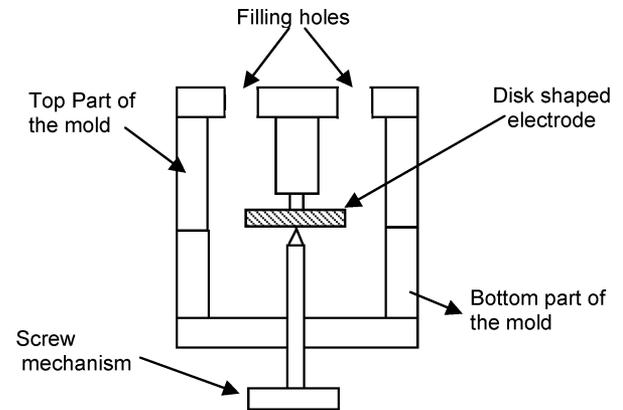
The cylindrical shaped negative mold for the fabrication of the casting of each electrode in silicone.
